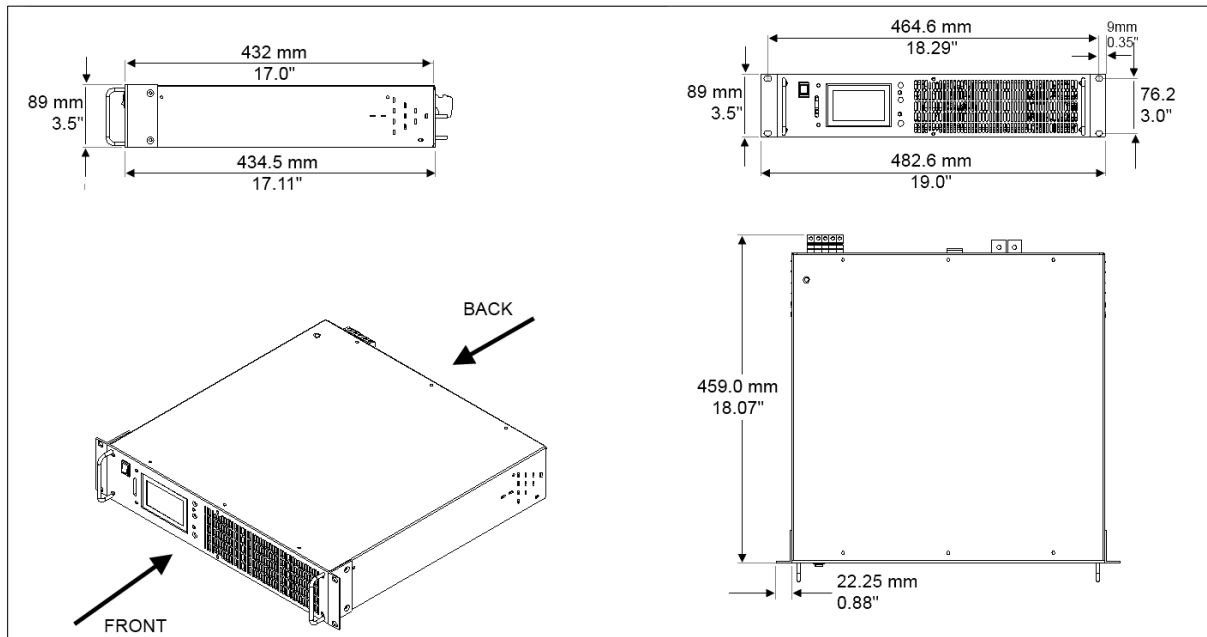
Dimension Drawing DDP 3KW - 5KW Models
